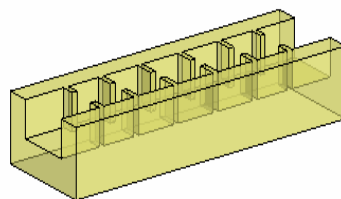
The hot embossed plastic piece is detached. Then Cr/Pt is sputtered on both the hot embossed plastic piece and the silicon cover.
